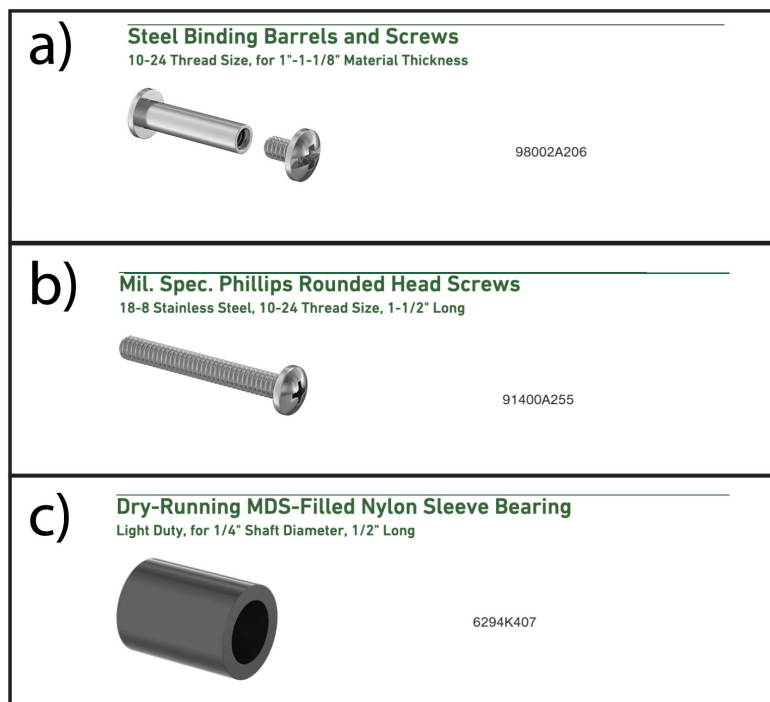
a) 10-24 thread binding barrels were used as the rotation pins that secured the linkages to the body of the Knee b) 10-24 thread screws used to mate the female component of the binding barrel c) Nylon bushing to reduce friction during rotation
